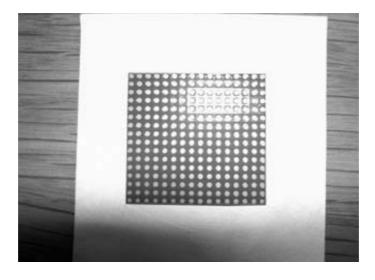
Bottom view of the PDA die after solder-mask-coating.
